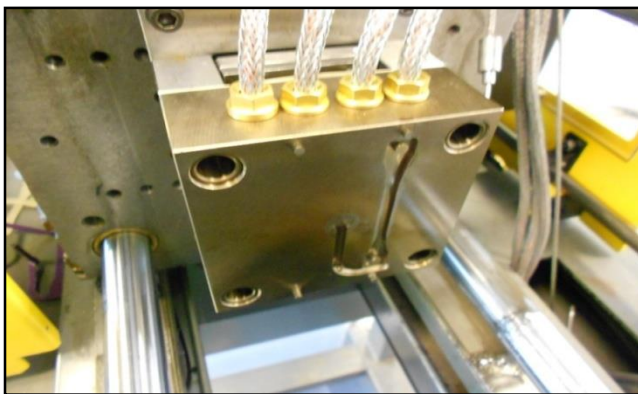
FANUC Roboshot i5A injection moulding machine, tensile bar and tablet mould design
